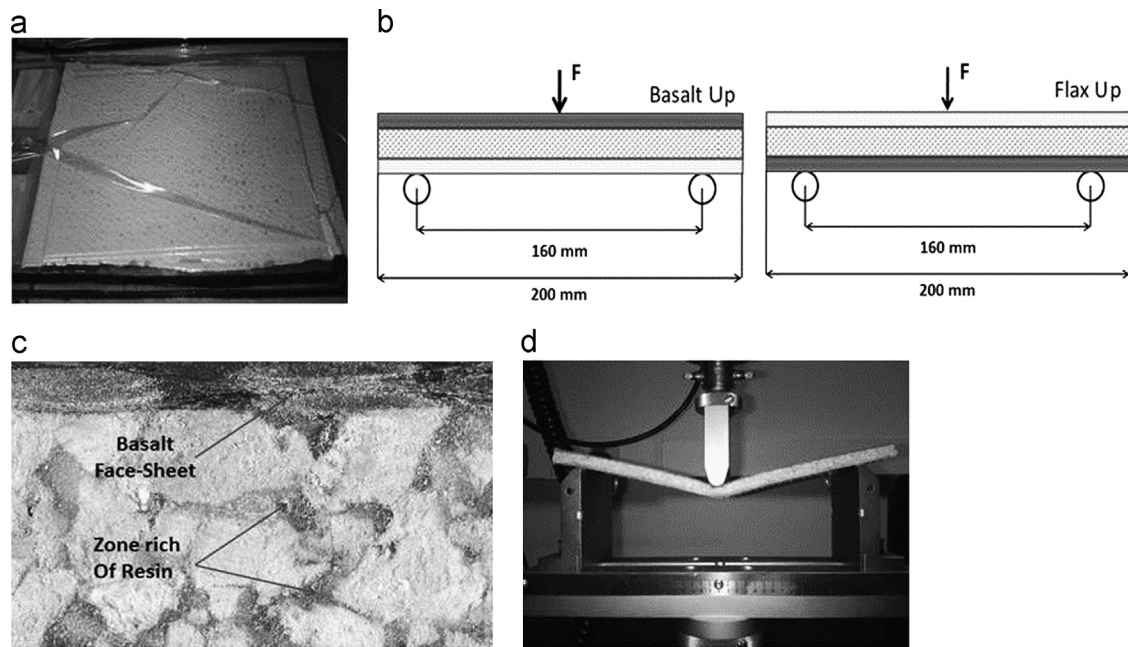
(a) Bagging process, (b) test configurations, (c) resin infiltration inside core and (d) specimen during bending test.
